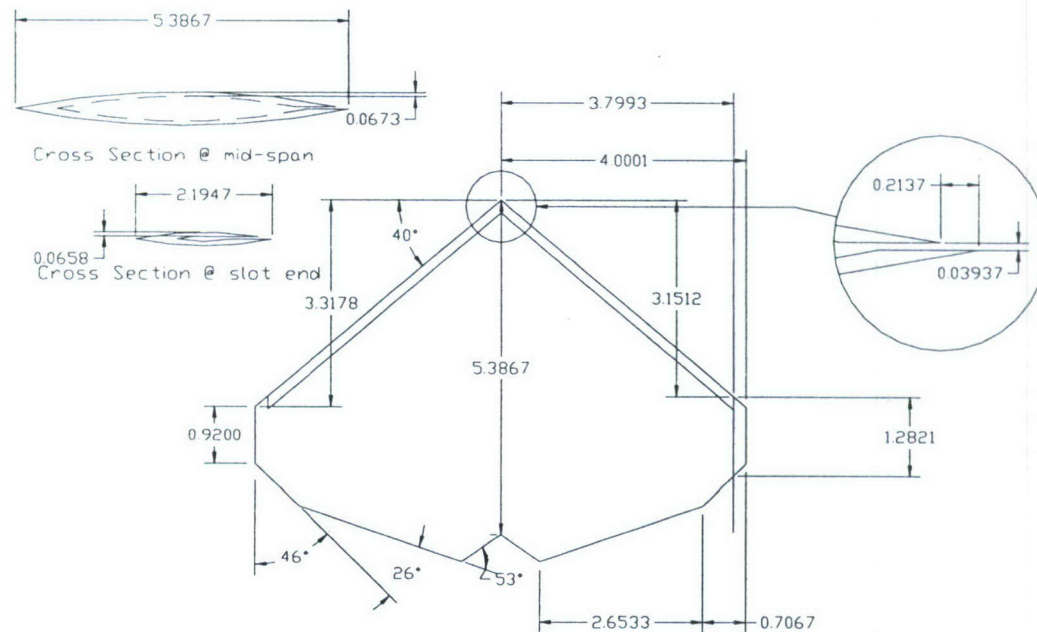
Engineering drawing of the trapezoidal planform model for water tunnel testing.
